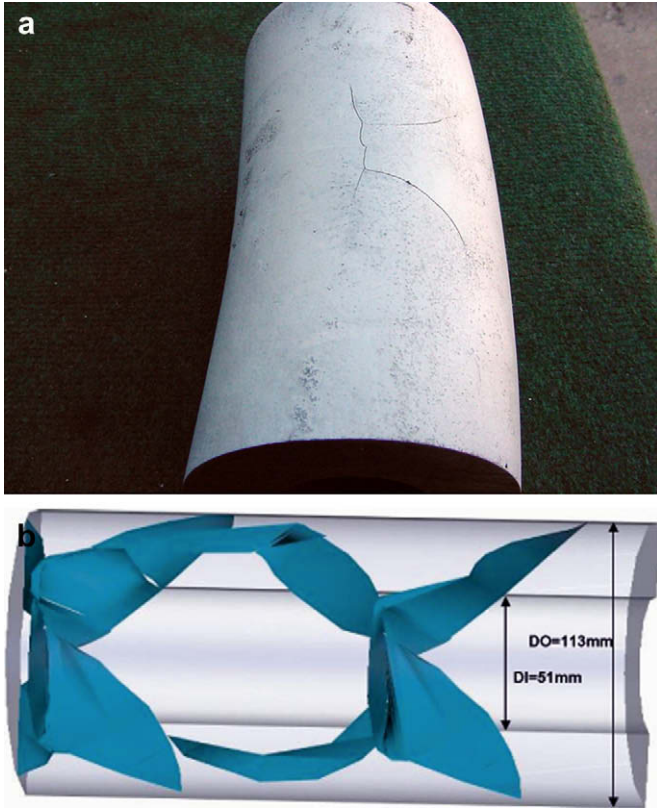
(a) Typical H-shaped, branched crack, as seen in the outer surface of the thick walled tube. (b) Mapping of typical crack branching and propagation in the pipe wall.
